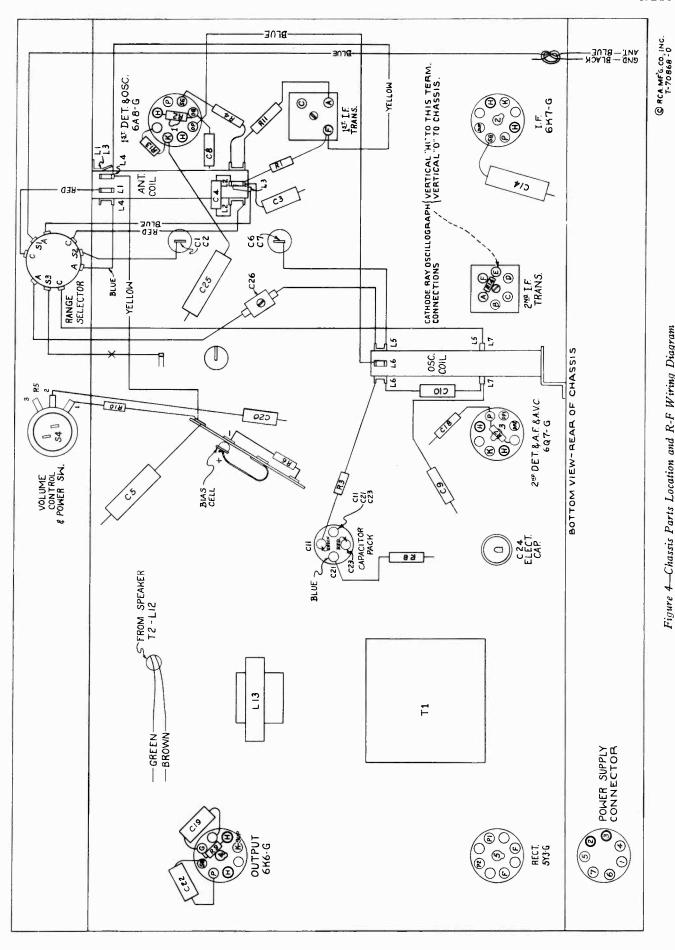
Chassis Parts Location and R-F Wiring Diagram
